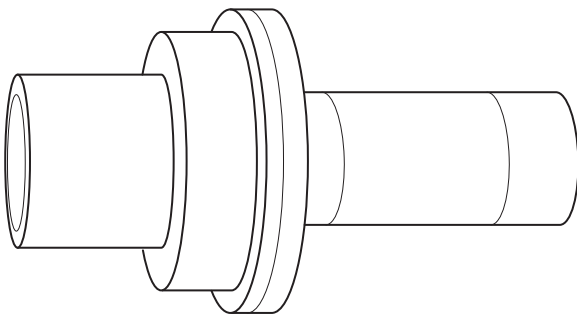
Oil Seal Pressing Tool (332/Y4027)
